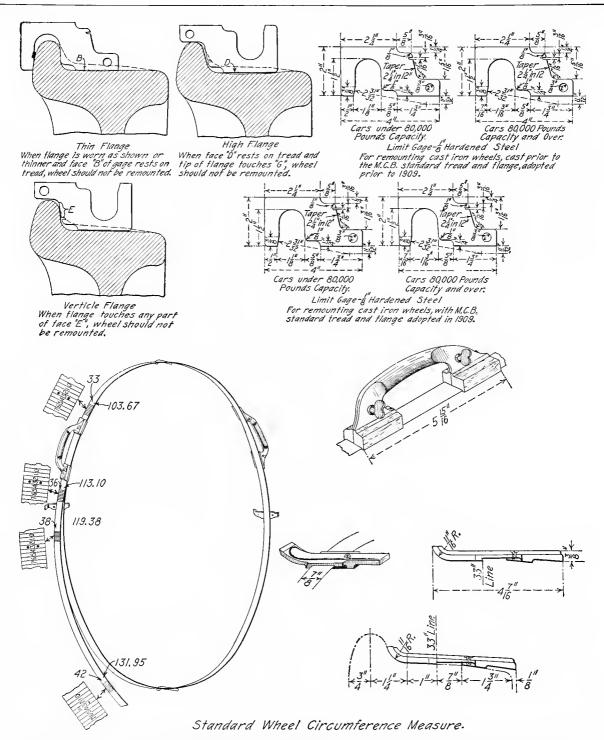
M. C. B. Standard Wheel Circumference Measure and Limit Gage for Remounting Cast Iron Wheels. (M. C. B. Sheet 16A.)
